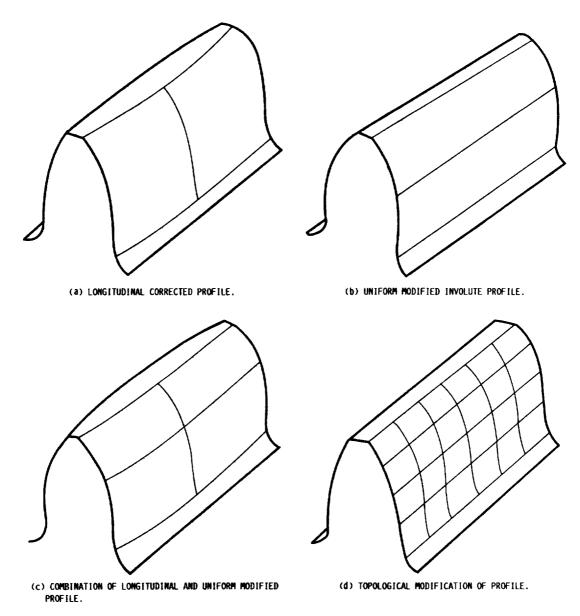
SPUR GEARS WITH MODIFIED TOOTH SURFACES.
